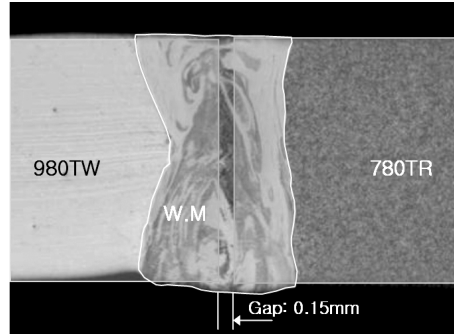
Schematic of calculating dilution ratio in weld metal for laser welded 980TW/780TR joint using Y309L filler wire
